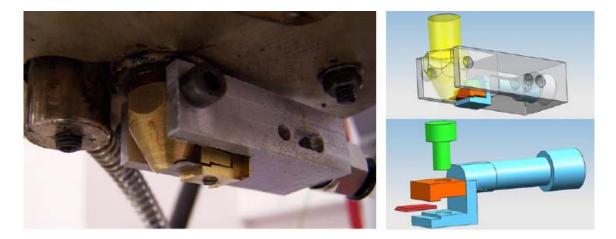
9: Location of the designed and manufactured subsystem on the nozzle, and CAD files of the system used in manufacturing
